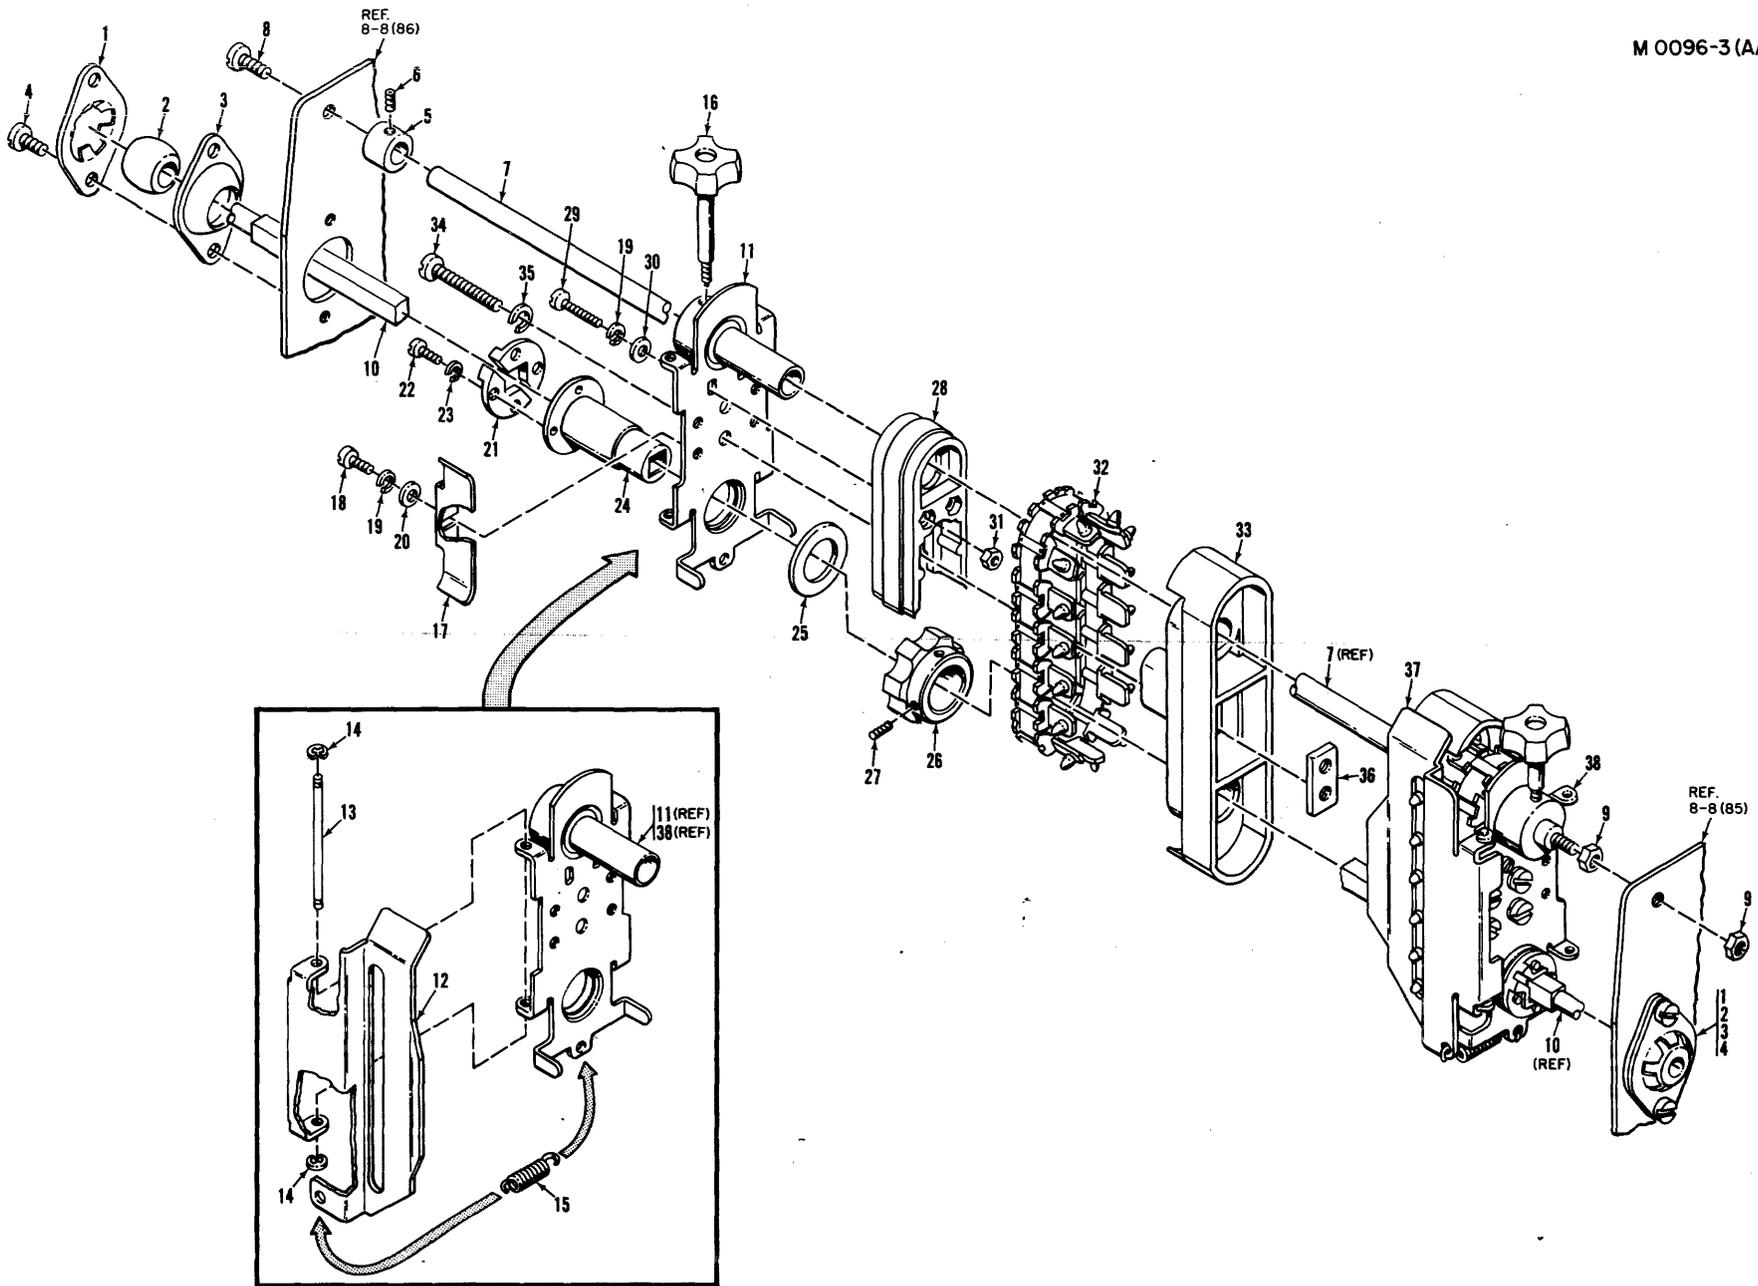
PIN FEED MECHANISM (LEFT AND RIGHT) – HG
